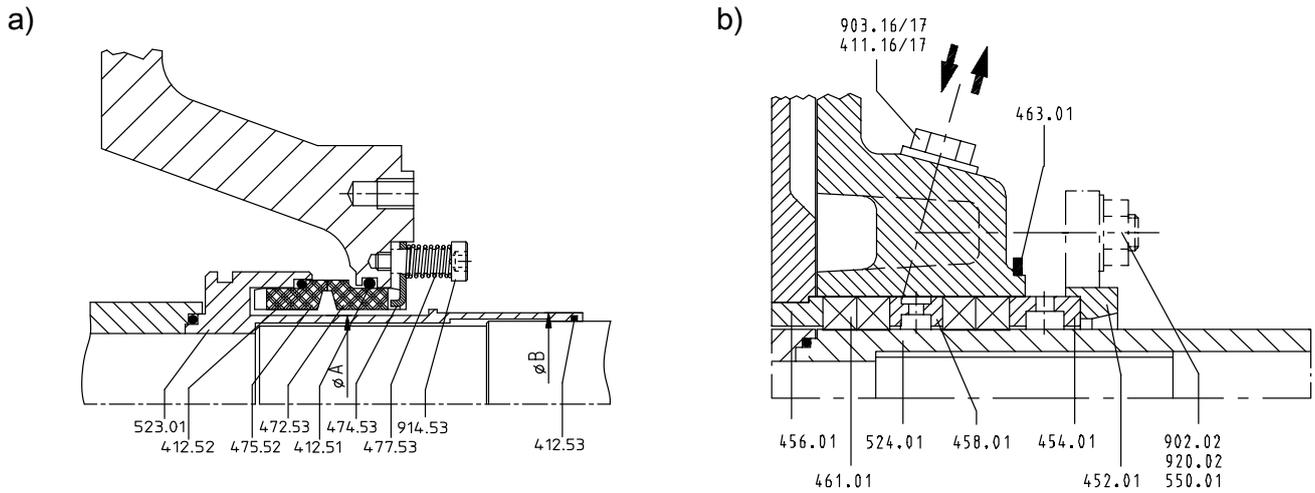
Shaft seal P03ax to P12sx: a) 4K mechanical seal; b) coolable gland packing
